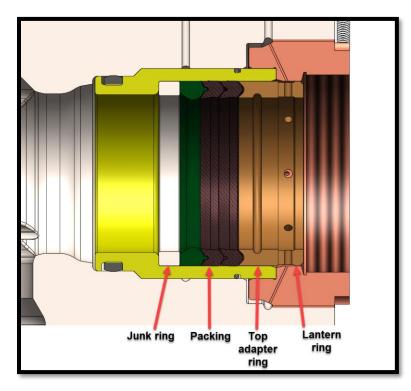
Packing bore cross section showing wear sleeve and packing set installed
